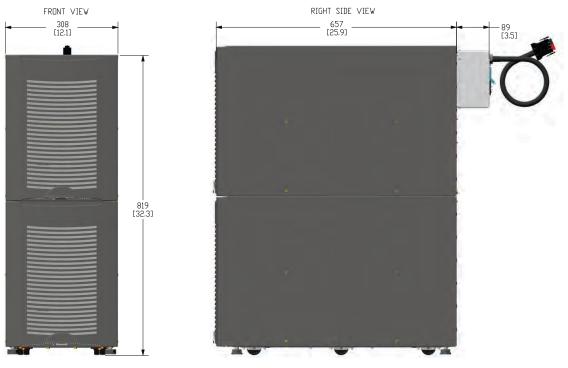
Extended Battery Module Dimensions (2-High Front and Right Side Views)
